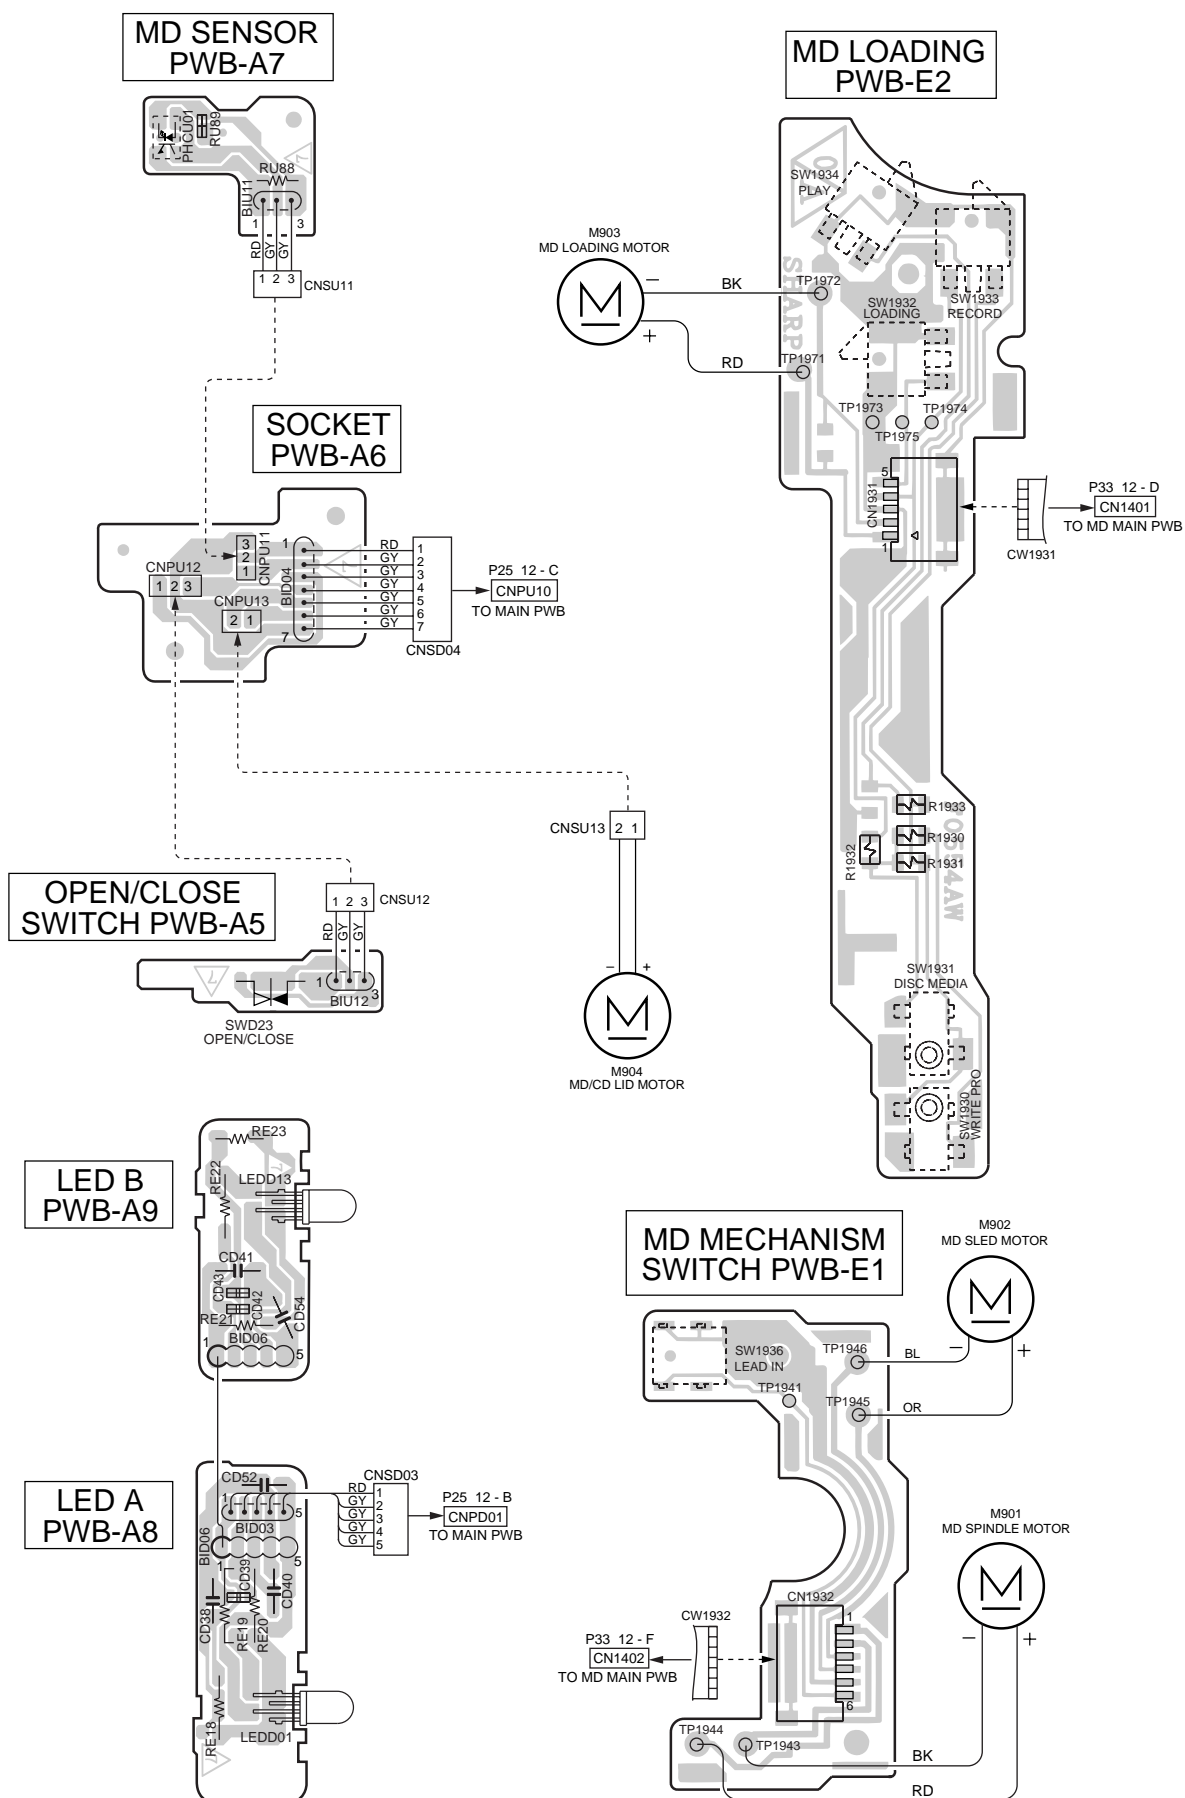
WIRING SIDE OF P.W.BOARD (5/11)
